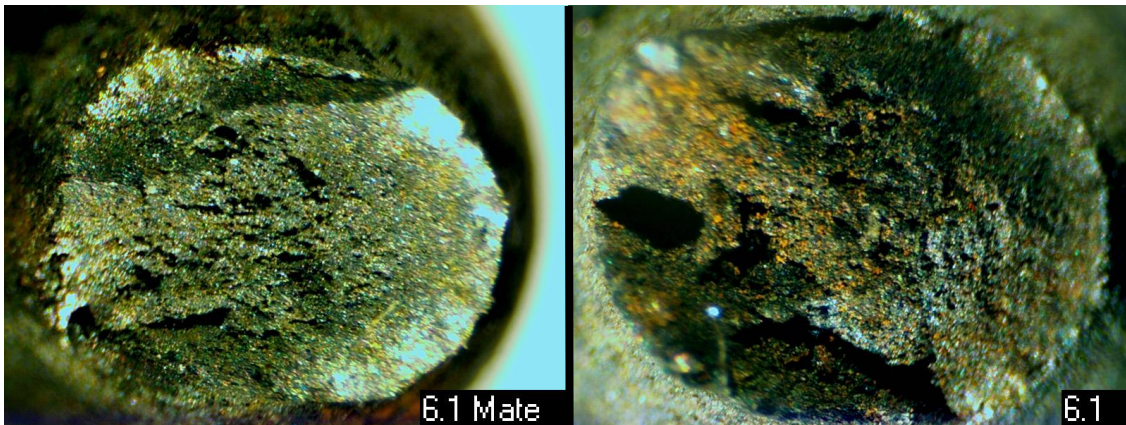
Visual inspection of test specimen 6 – fracture surfaces.
